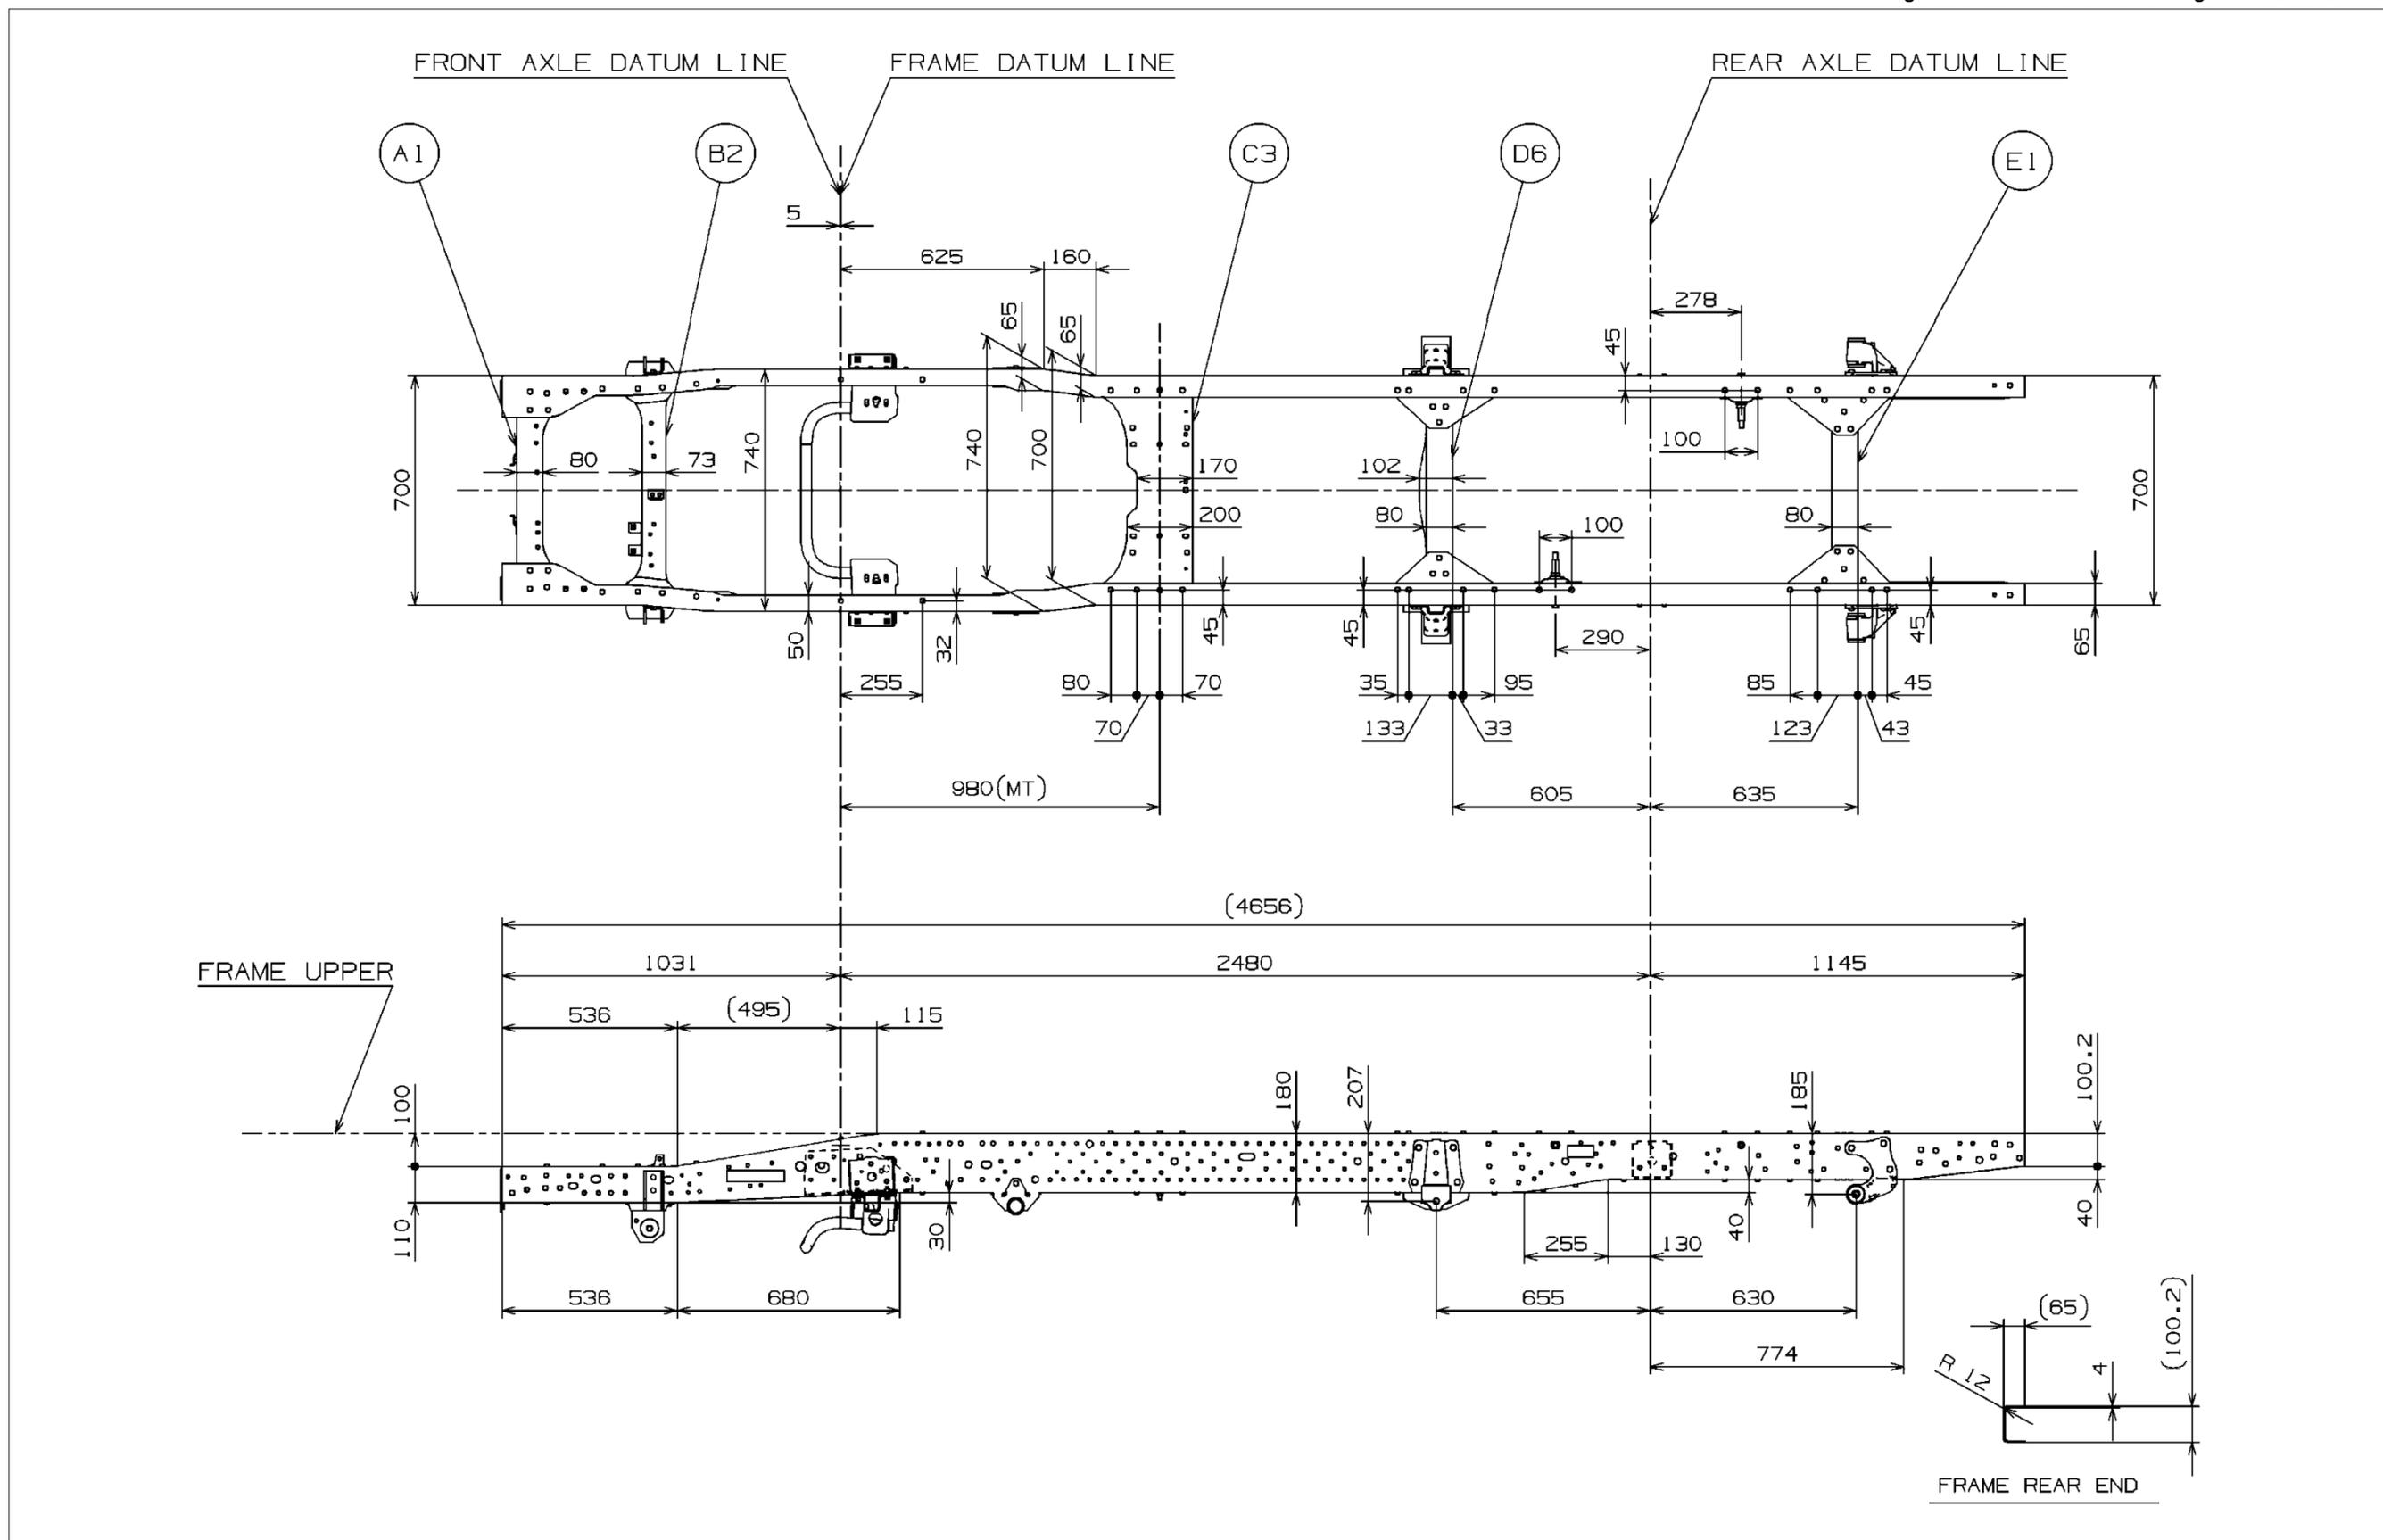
Chassis Frame Drawing NLR85L/U-HD5AYEN
